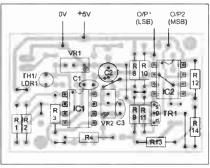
Component layout for the Temp/Light Sensor on the Multi-purpose p.c.b.
